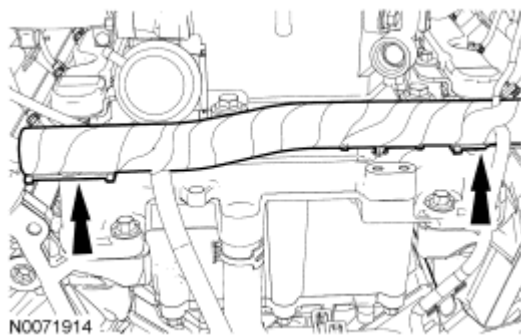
Locating Wiring Harness Pin-Type Retainers
